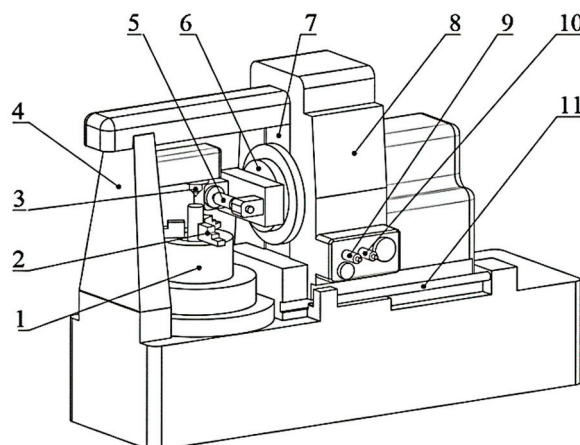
The structure schematic diagram of the Y-38 gear hobbing machine: 1—rotary workbench; 2—loading fixture of the gear blank; 3—live center; 4—hobbing machine body; 5—cutter; 6—cutter holder and its turntable; 7—radial rail; 8—axial workbench; 9—axial feed handwheel shaft; 10—radial feed handwheel shaft 1-axial rail.
